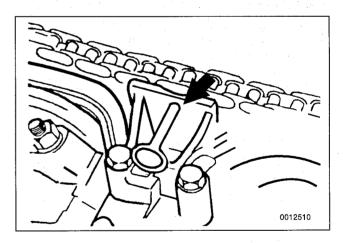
Camshaft locking tool (BMW special tool no. 11 3 240) installed on rear of camshafts. (M44 engine shown. Other engines are similar.)
